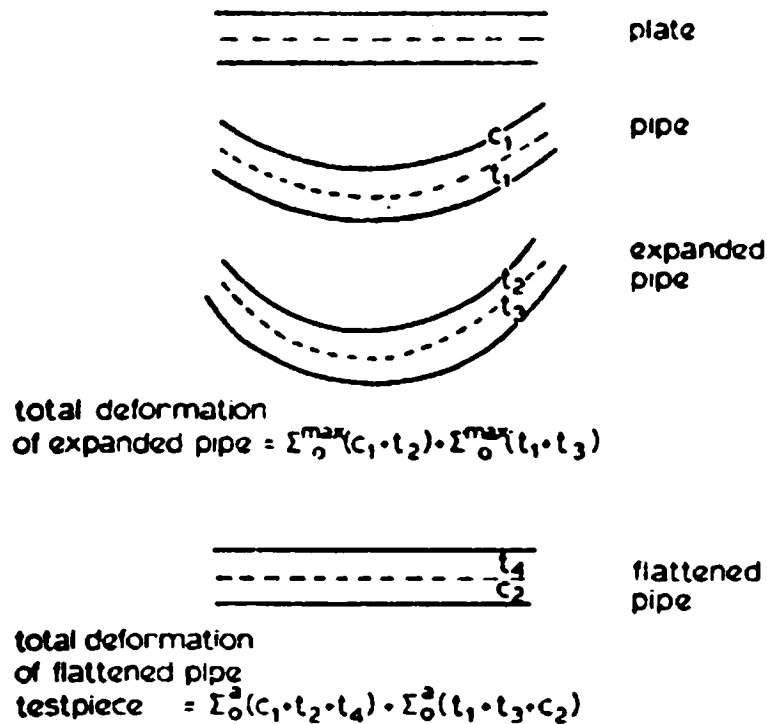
Deformation in converting the plate to expanded pipe [Sage83].
